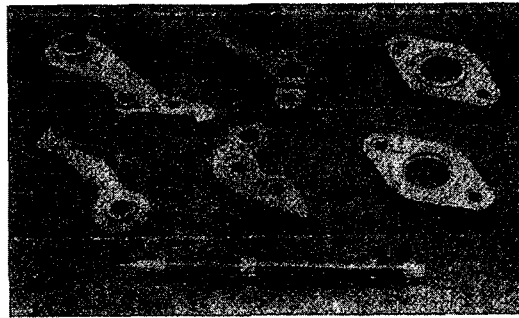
Some samples of precision electric parts by sheet metal forging [8]
